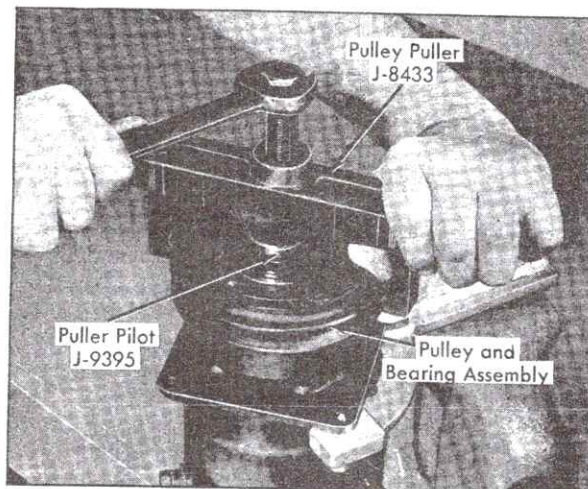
Removing Pulley &amp; Bearing Assembly
